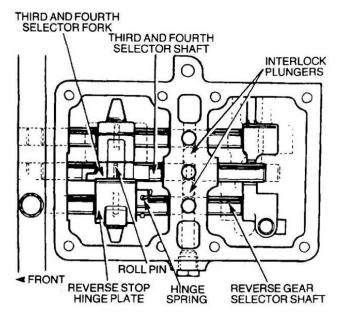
Installation of the Third and Fourth Gear Selector Fork
